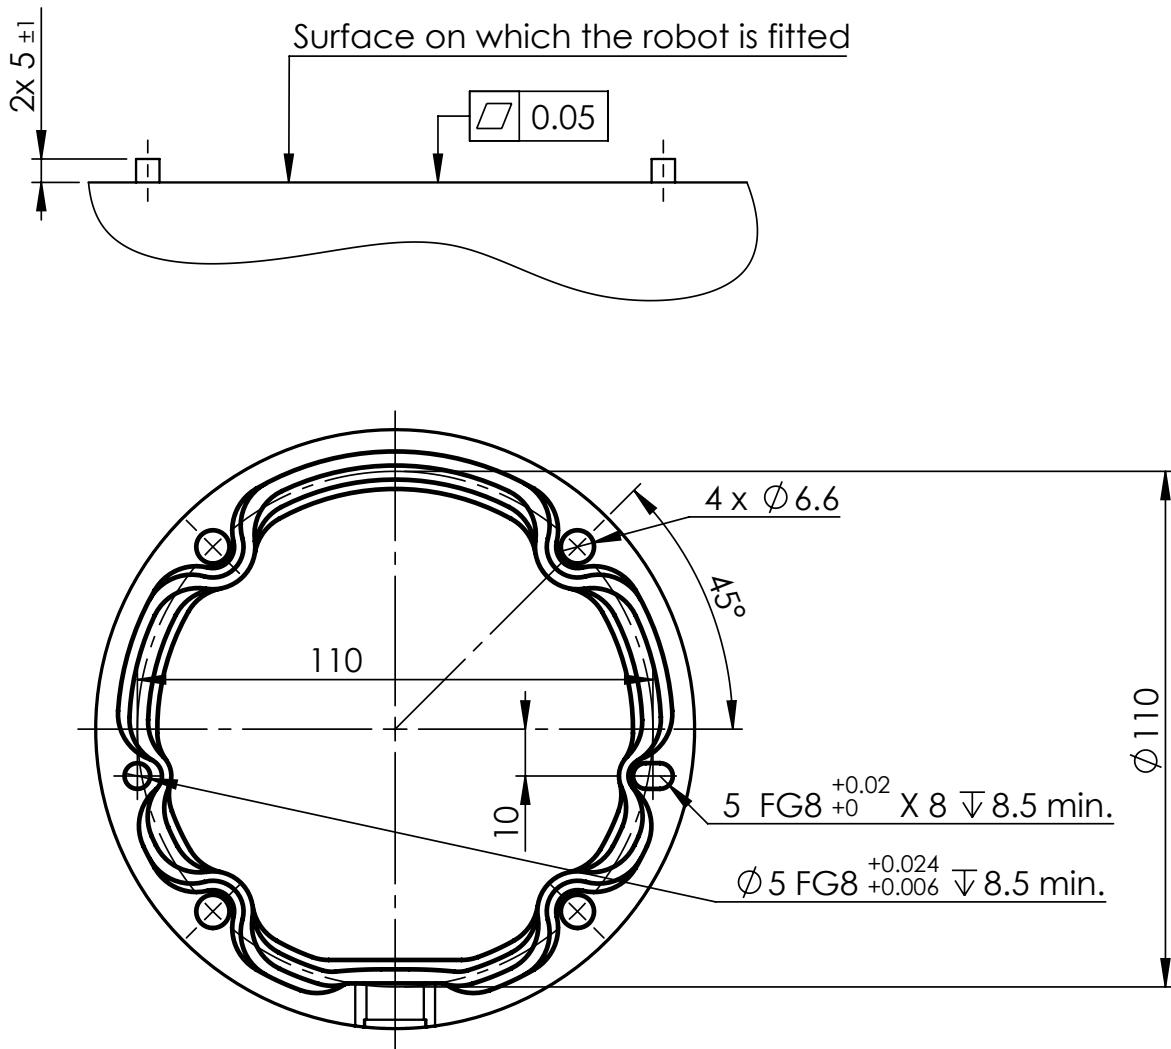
Holes for mounting the robot. Use four M6 bolts. All measurements are in mm.
